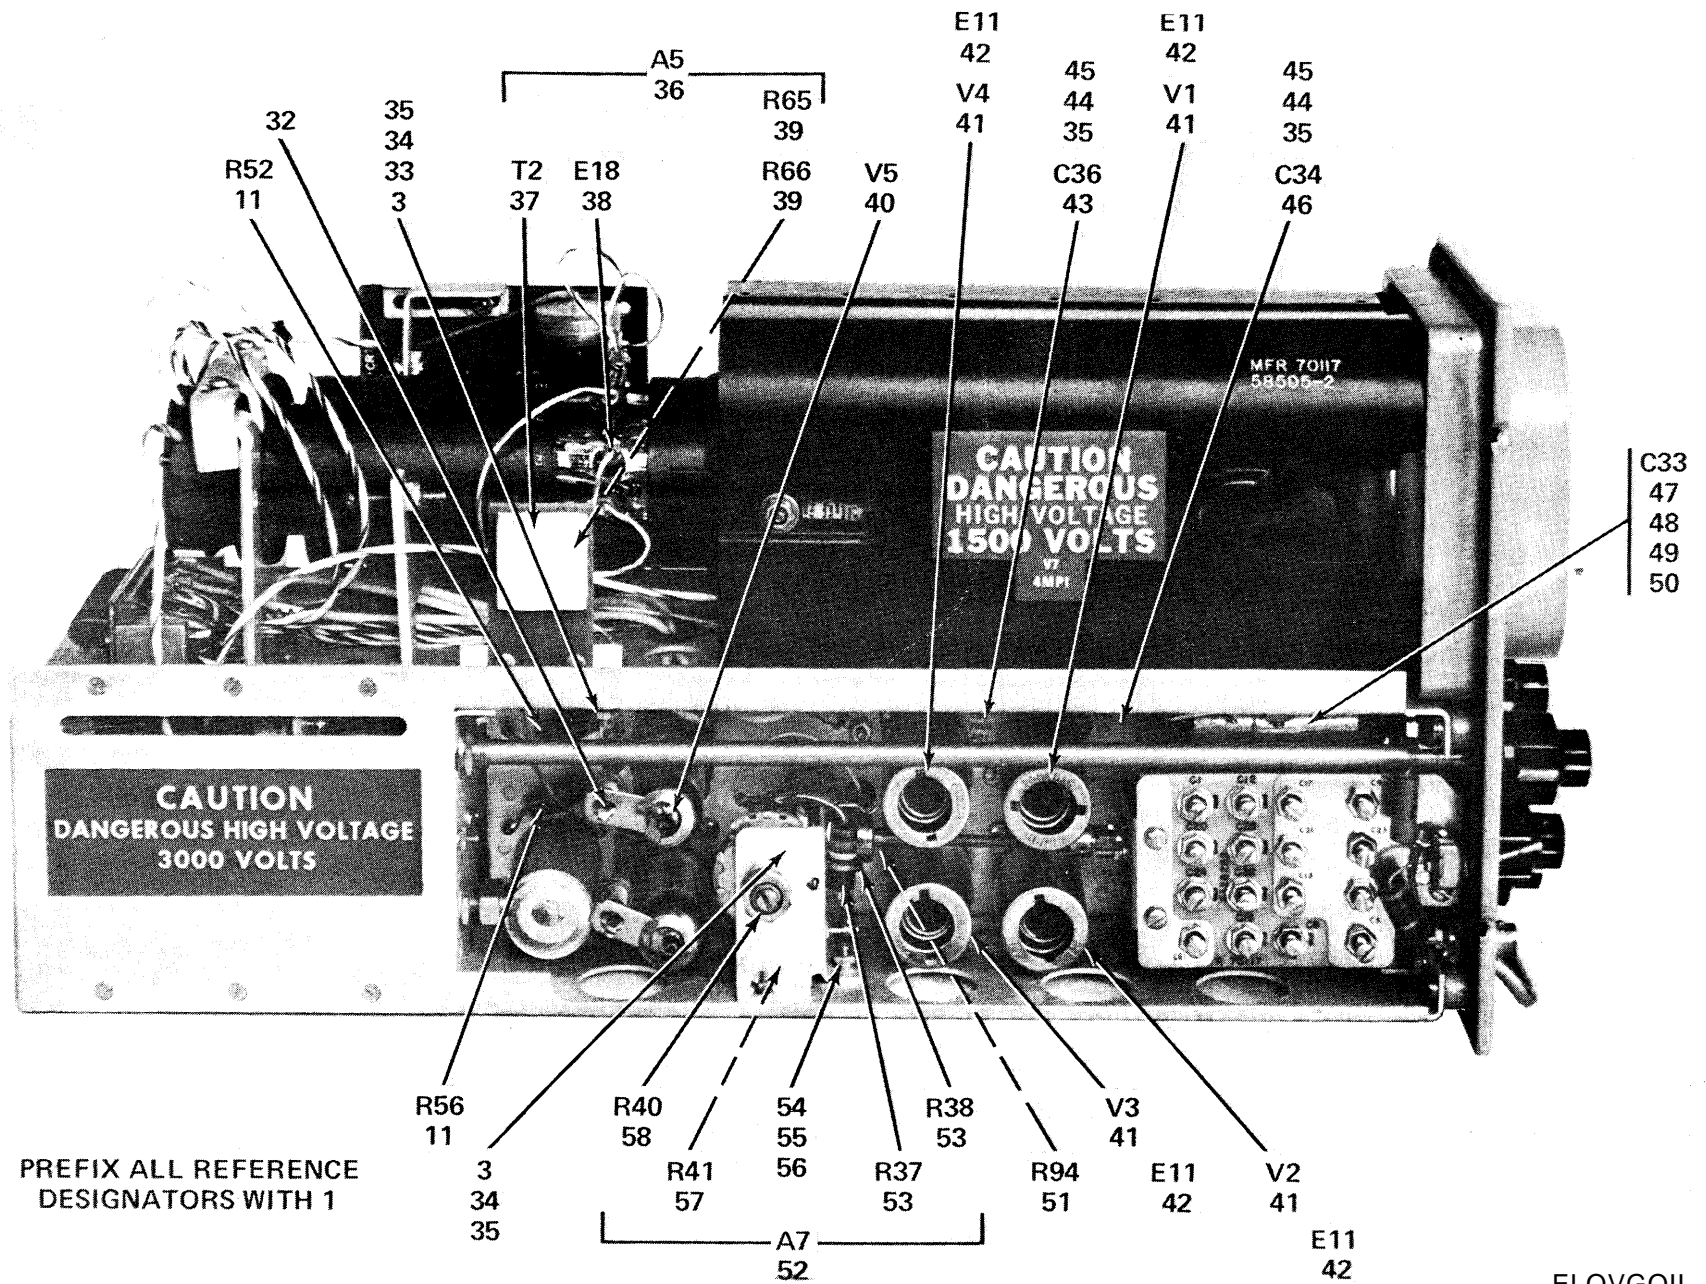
Ⓢ Chassis assembly, unit 1 (sheet 2 of 3).
